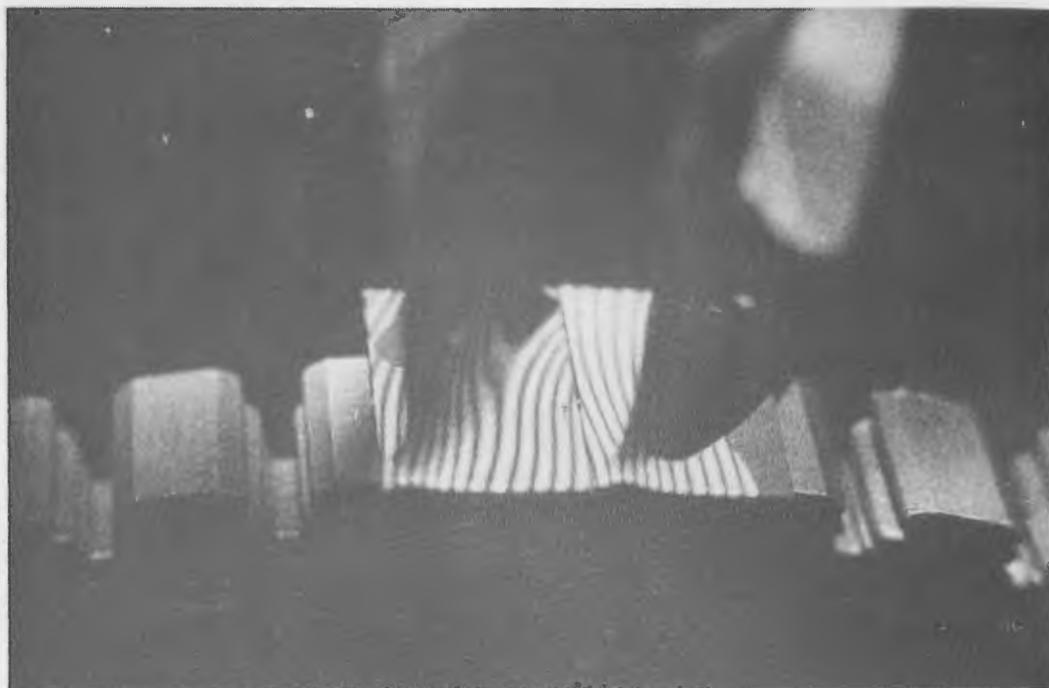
END-ON VIEW ILL-FITTING BLADE
